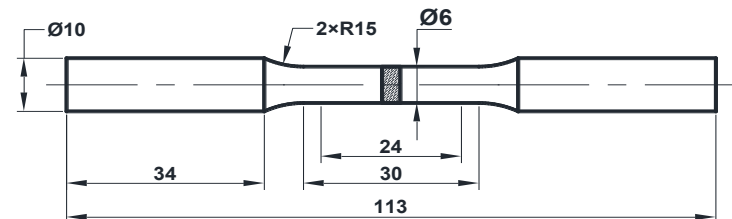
Dimension specifications for tensile testing specimen (all in mm)
